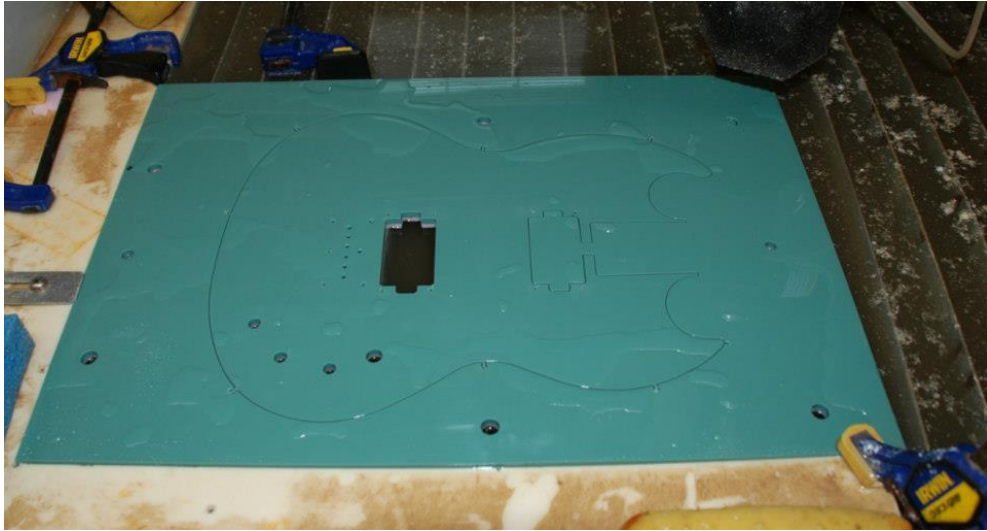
Waterjet Machining Layer 1 of Prototype #1
